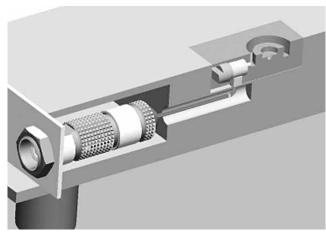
Installation from the side, sensor, cable, connector and mounting plate
